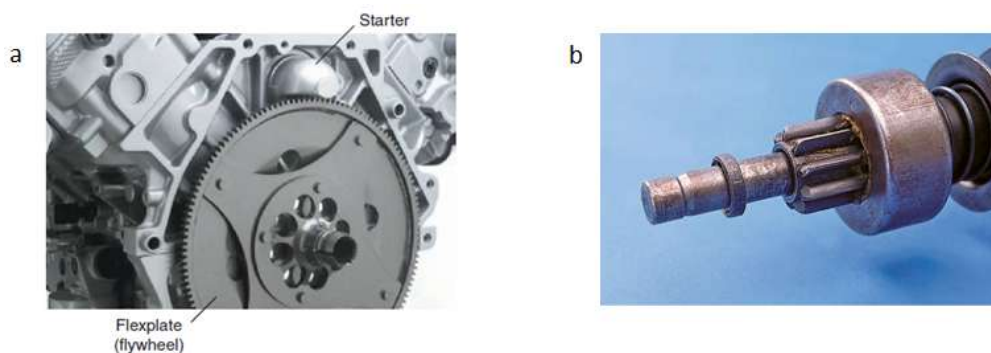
Starter drive pinion gear is used to turn the engine's flywheel, b) the pinion gear teeth are tapered to allow for smooth engagement.
